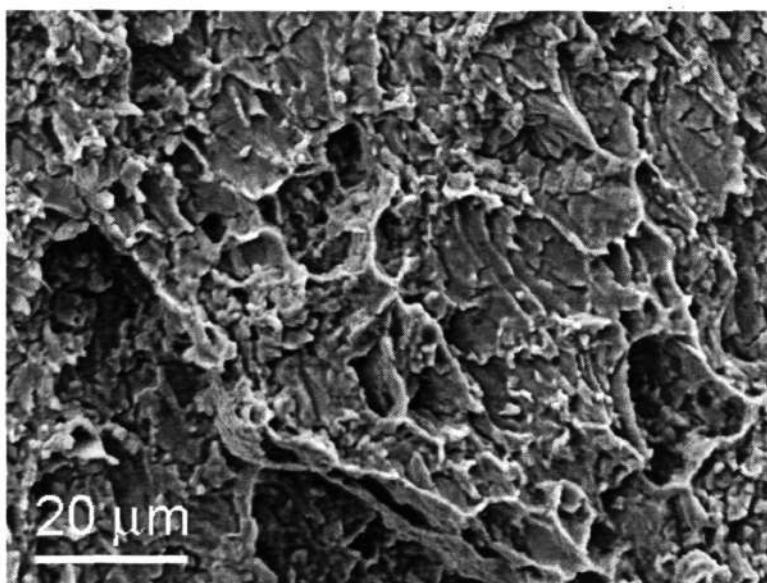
SEM (SEI) image showing the typical intergranular fracture of the solder/copper joint fracture surface under both isothermally aged at 125 and 150 °C.
